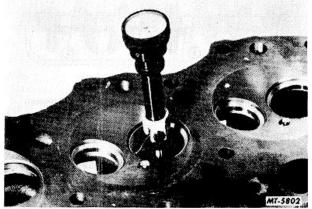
Checking Seat Run-Out It is important to have the finished seat face contact the approximate center of the valve face. To check face contact, place a thin coat of Prussian Blue on valve face. Position valve in cylinder head and tap valve lightly to its seat. Inspect each valve for seat dimensions as outlined in specifications
